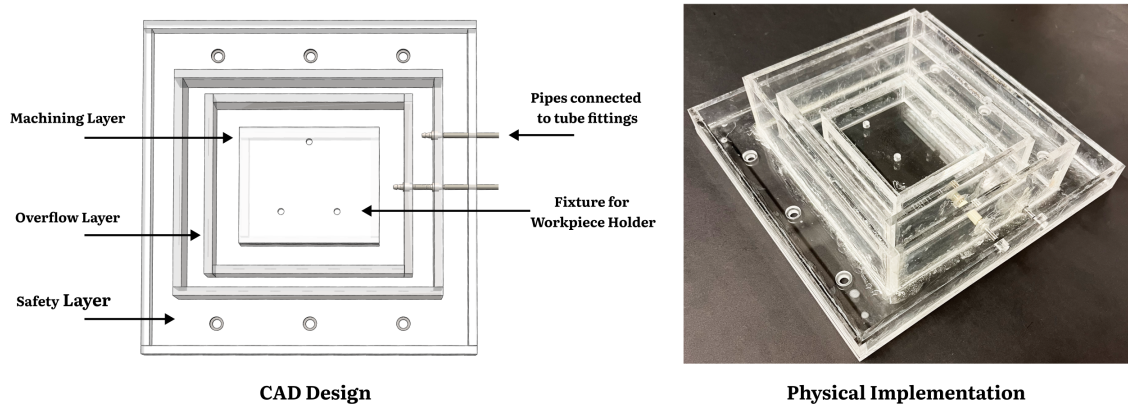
The Design and Physical Implementation of the Processing cell in SACE setup. The inner layer embodies a fixture that can be screwed to a modular workpiece holder. Barbed tube fittings were used to enable circulation of electrolyte between the middle layer and inner layer that contains the workpiece..
